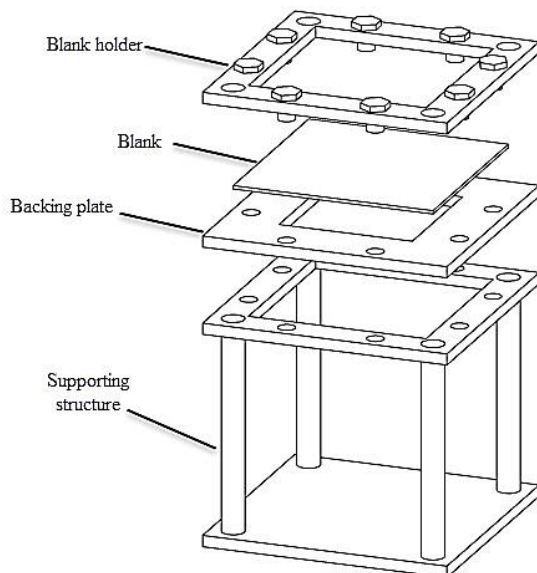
Sheet clamping mechanism for single point incremental forming
